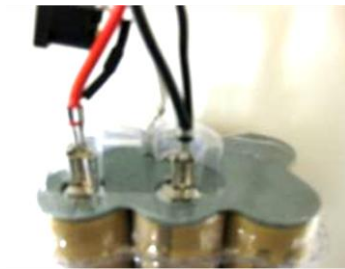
Quick wire connections from switch to battery pack within motor & switch sub assembly
